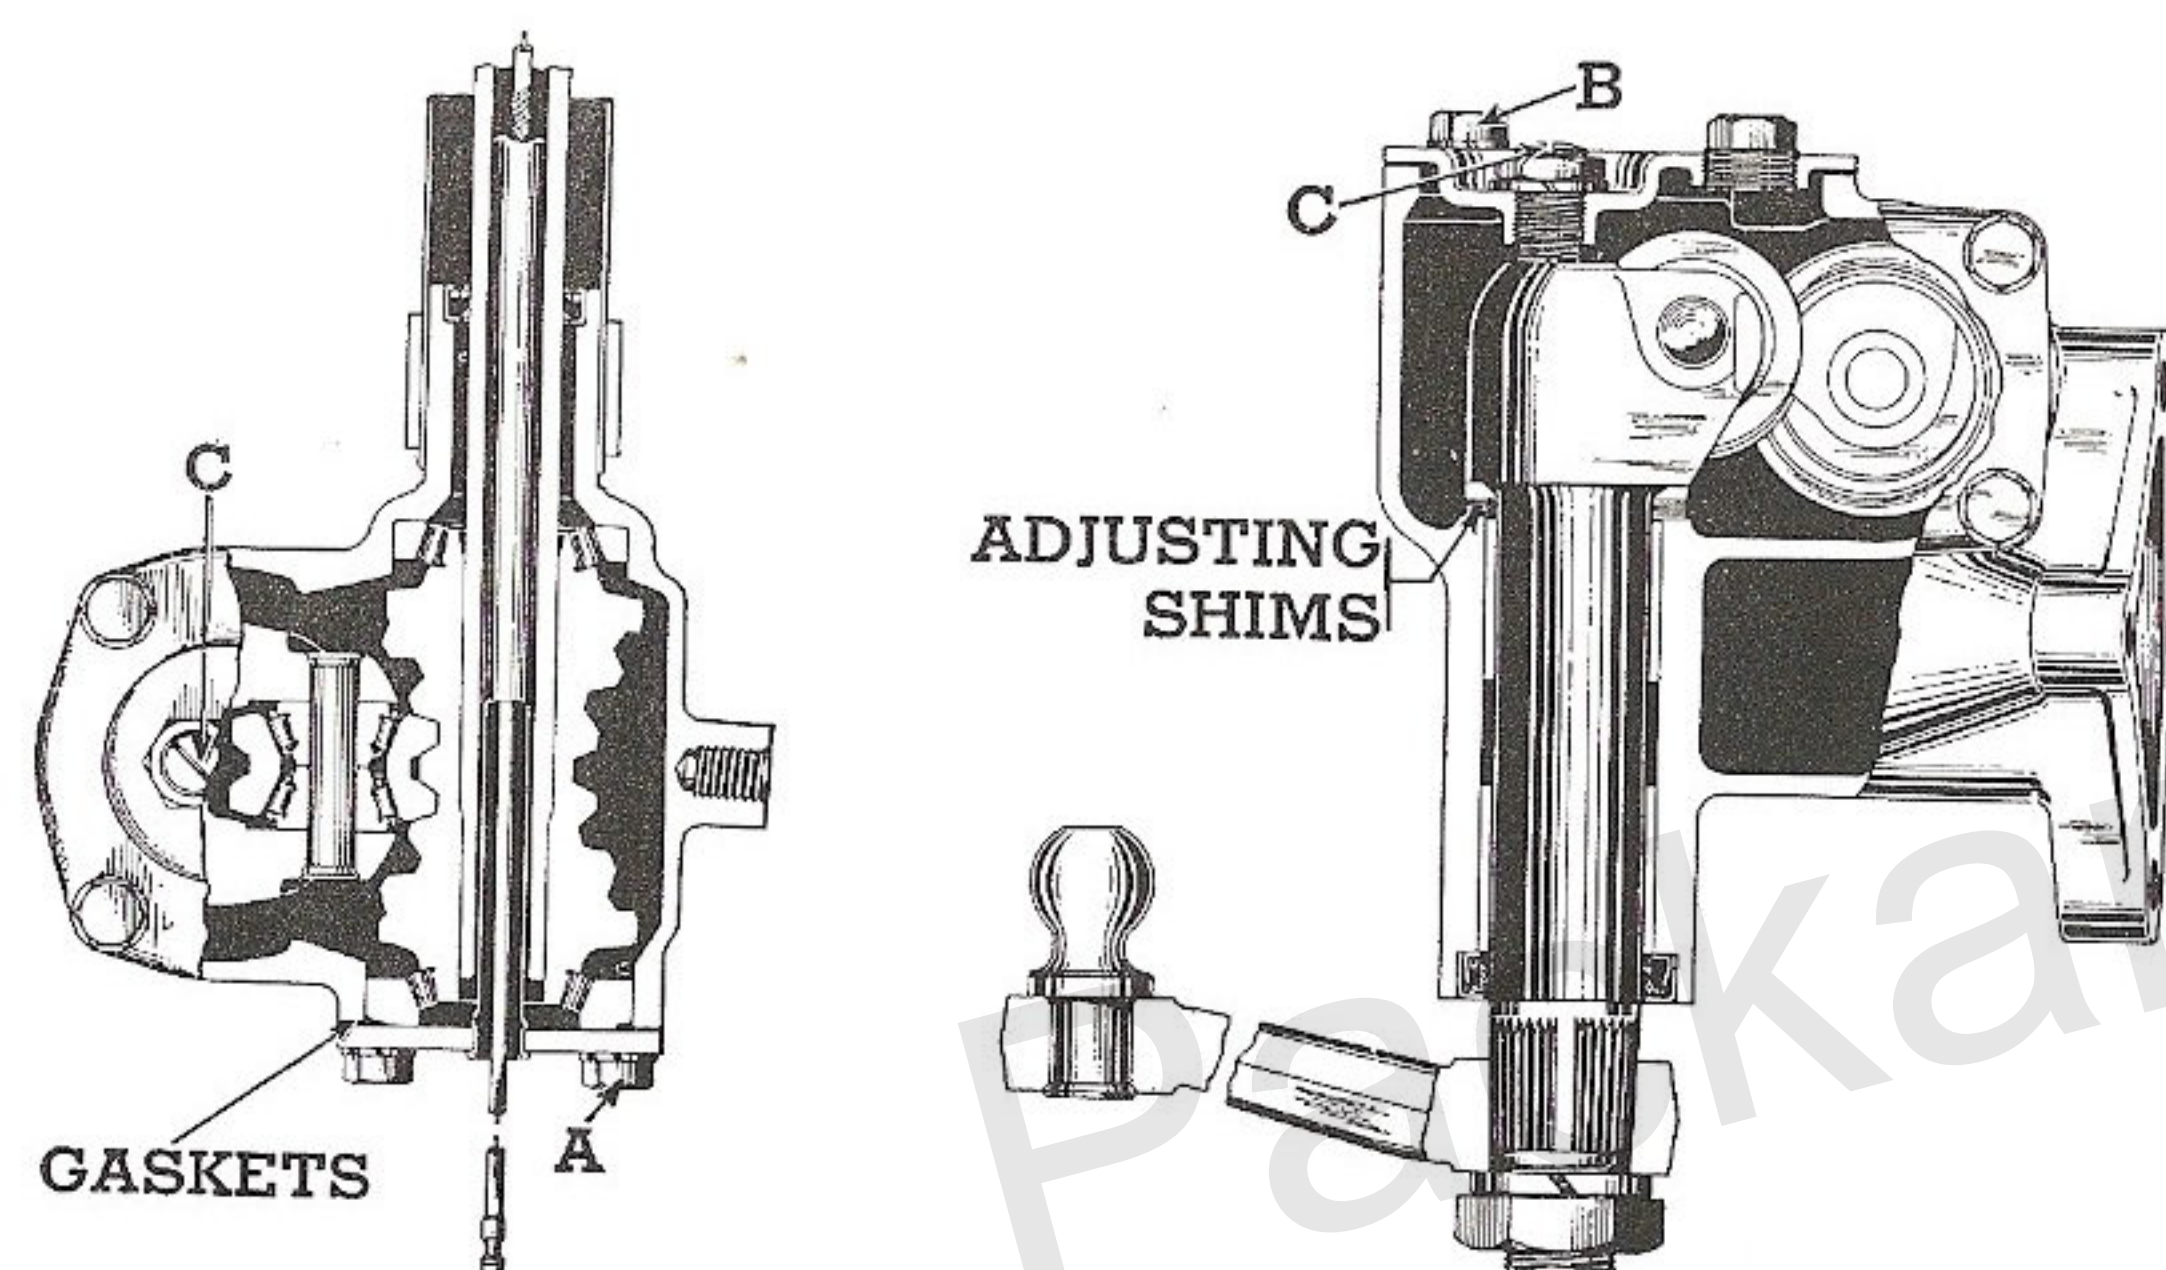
Steering Gear is of the Integral Housing Type. Bearings Supporting the Column and Cross Shaft Roller Should be Adjusted to a Preload as Outlined in Text. On Some Cars the Roller is Mounted on Ball Bearings Instead of the Roller Type Shown
